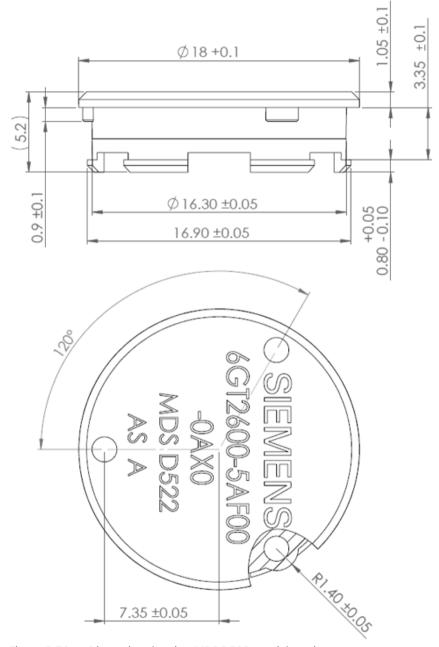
Dimension drawing MDS D522 special version All dimensions in mm
